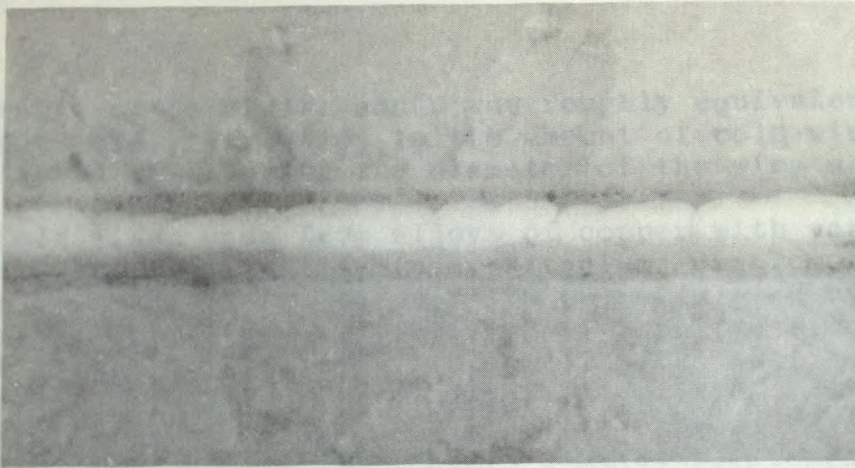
X-ray Print of Weld Made with 2X Filler Wire.
